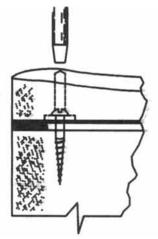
Use a narrow screwdriver with rounded corners to prevent damage to the recoil pad material.
